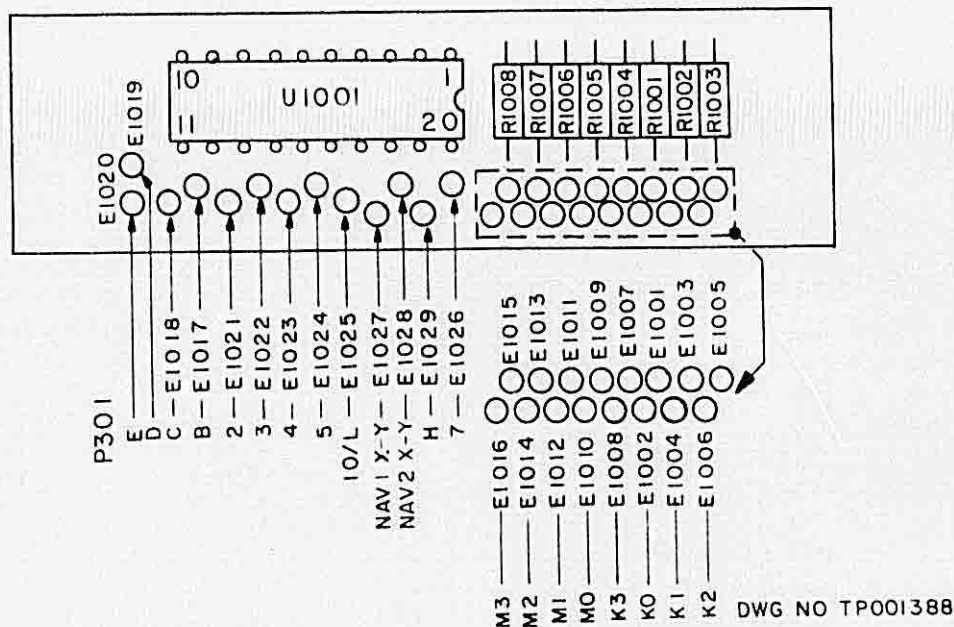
SLIP CODE BOARD COMPONENT LAYOUT
